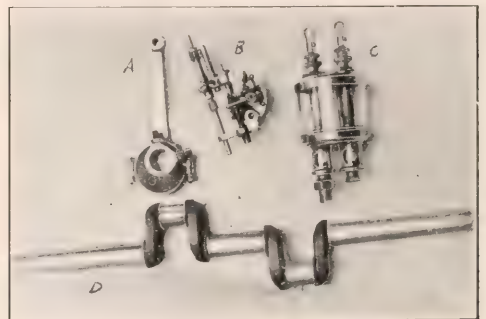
Some of the parts of the engine: *A*, eccentric and rod; *B*, make and break sparker; *C*, oil cup; *D*, crank shaft.
